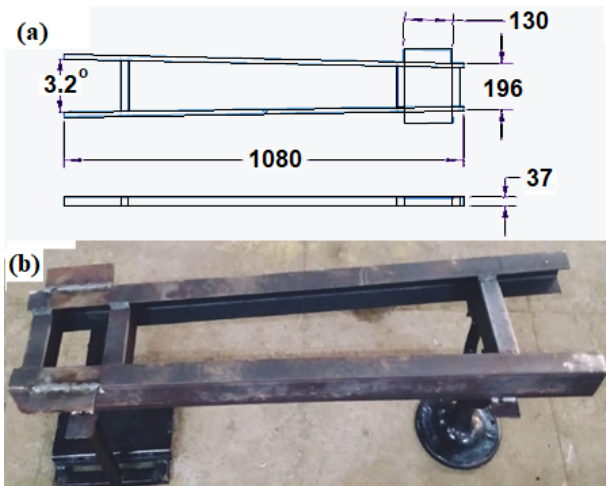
(a) Chassis dimensions; (b) Fabricated chassis
